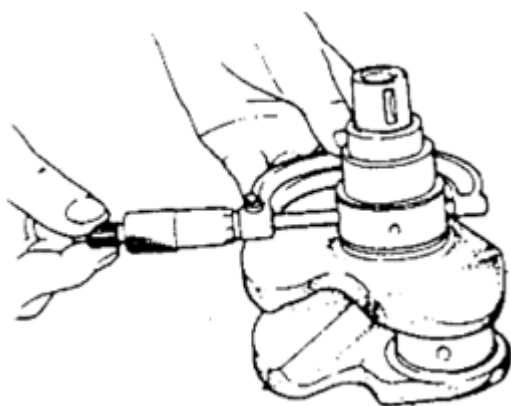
Identifying Undersize Of Crankshaft Main Bearing
